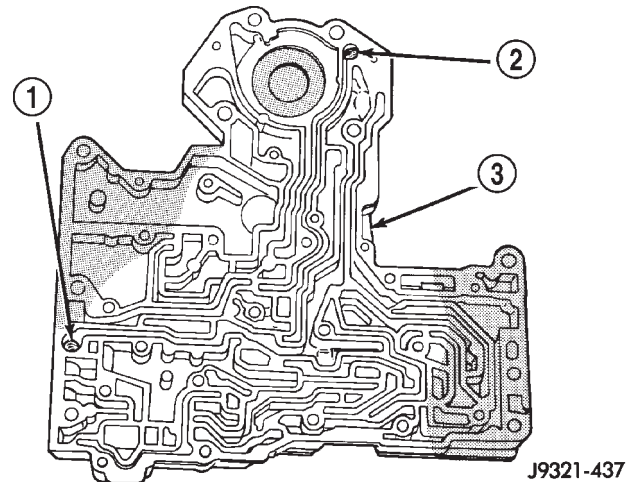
Rear Clutch And Rear Servo Check Ball Locations
